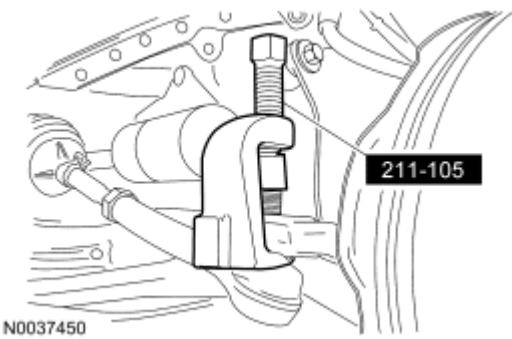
Separating Tie-Rod Ends From Wheel Knuckles Using Special Tool (211-105)
